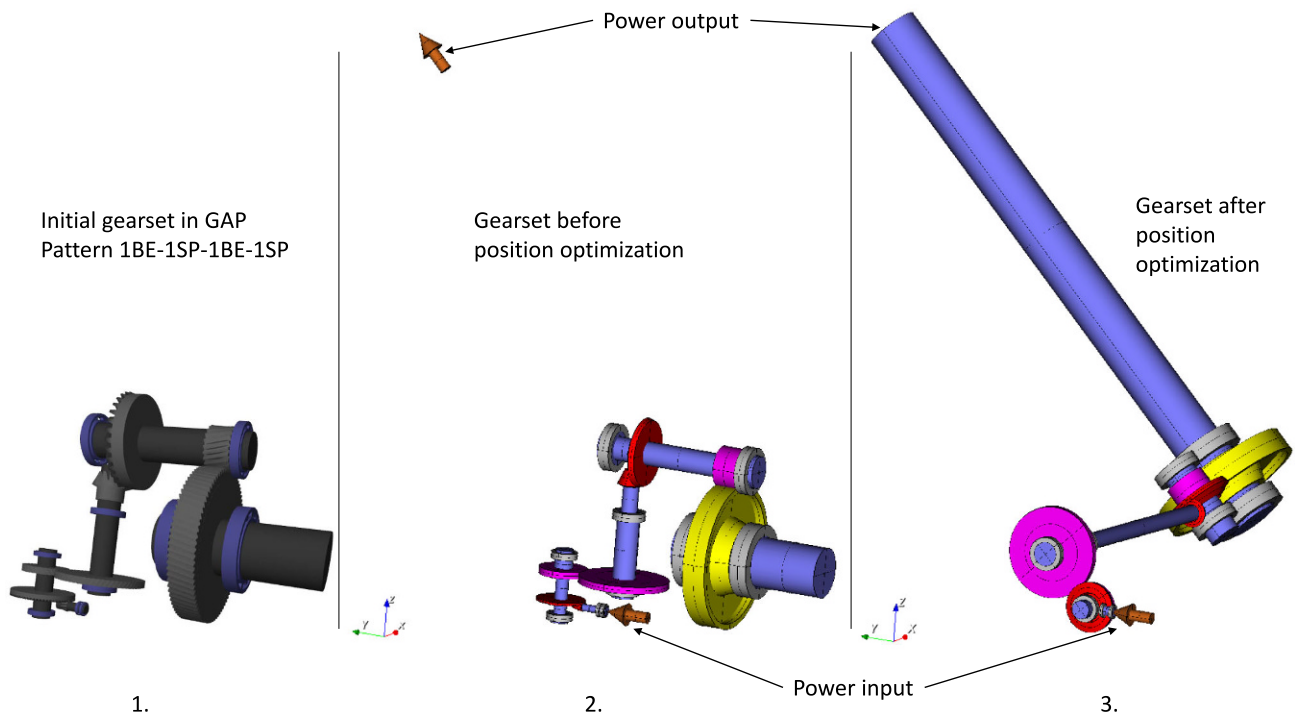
Uscase 4; Gearset with two bevel gearstages (BE) and two spur gearstages (SP); before and after positioning
